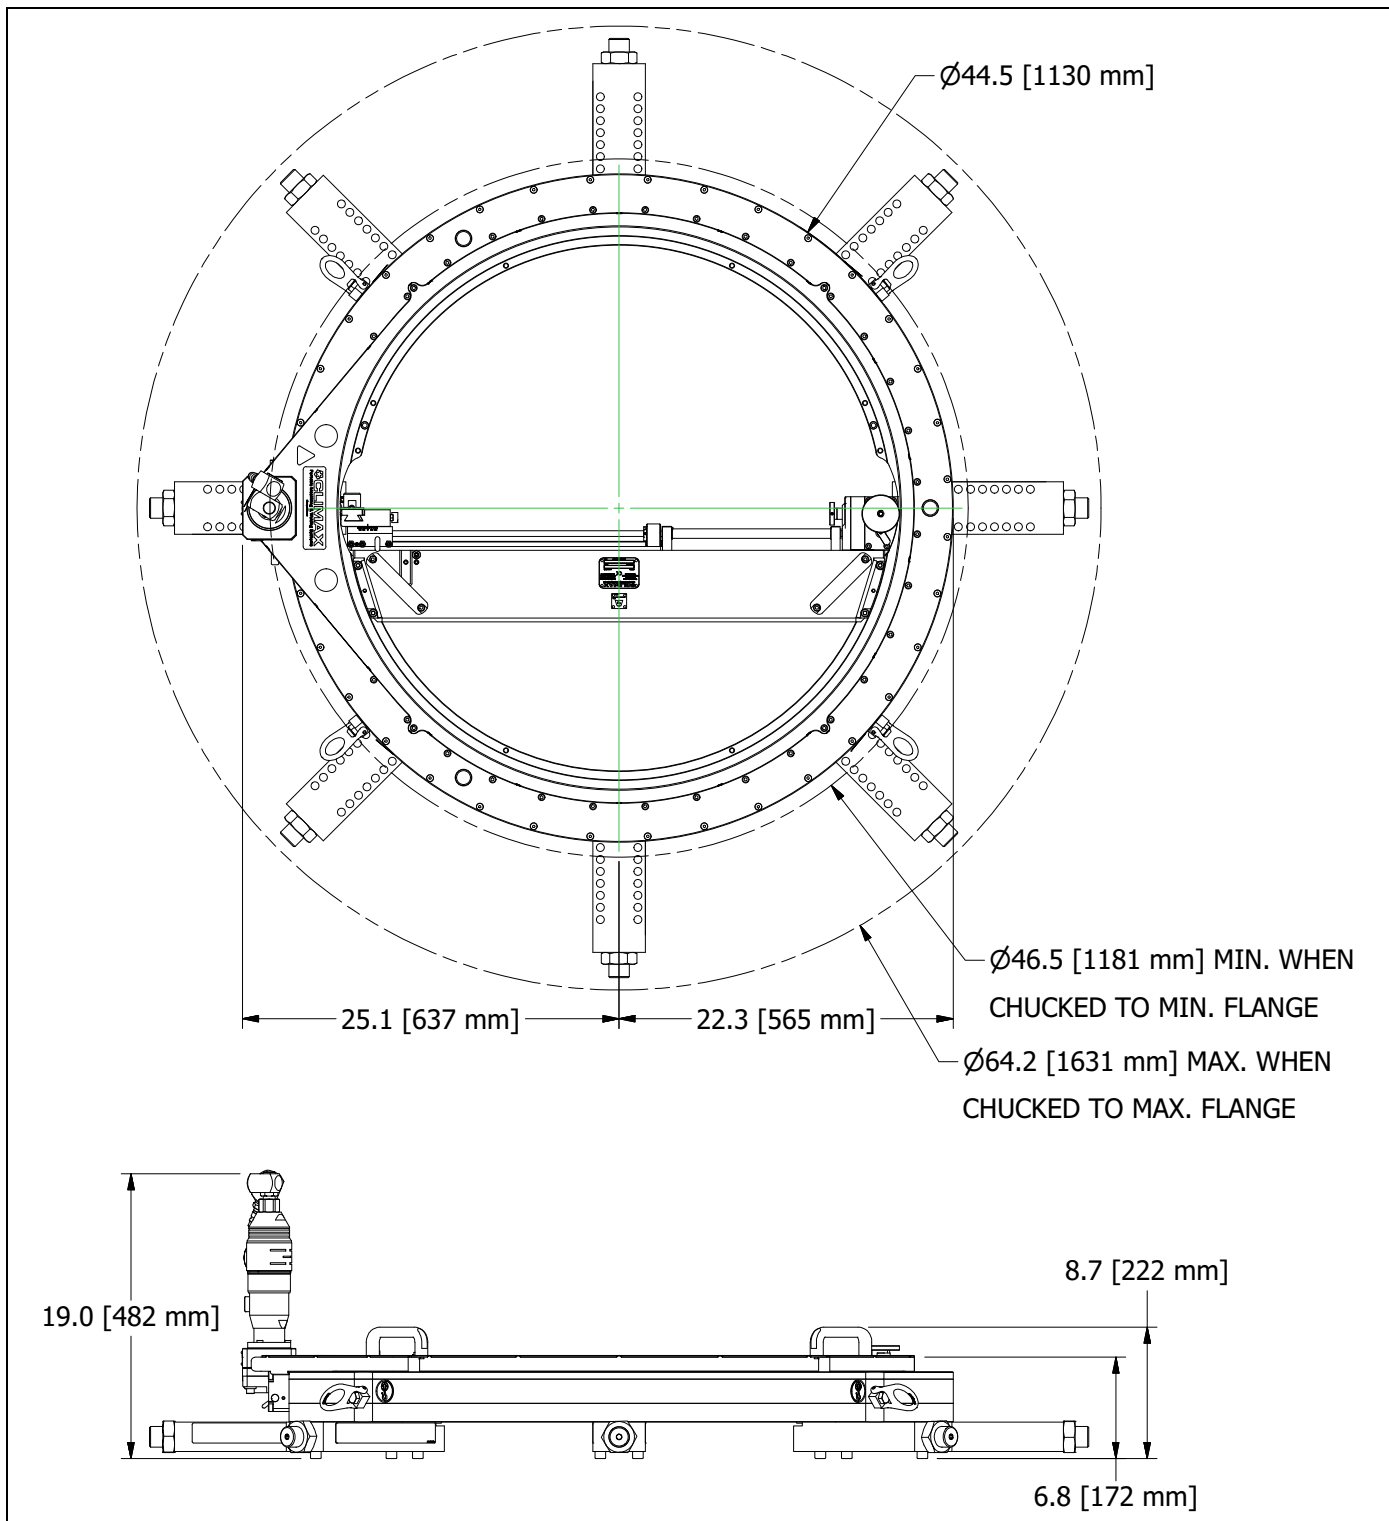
FF3600 MACHINE DIMENSIONS
